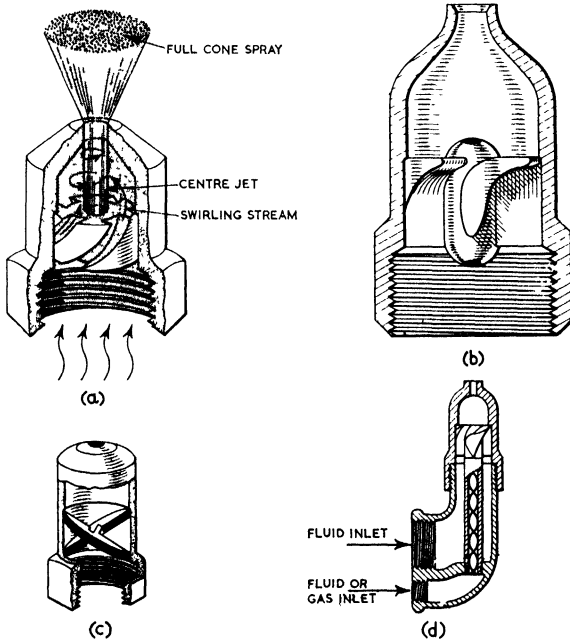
VARIOUS TYPES OF NOZZLE FOR PRODUCING FULL CONE SPRAY.
